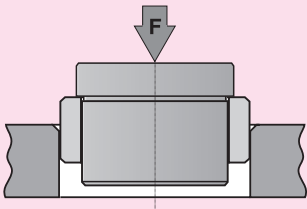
Press-fitting of AVI Oilless radial bearings
